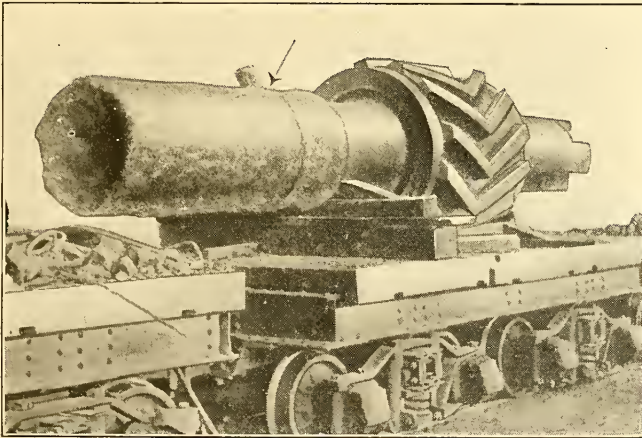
New Neck Welded to Large Steel Pinion. In this Case the Pods Were Milled Afterward.
